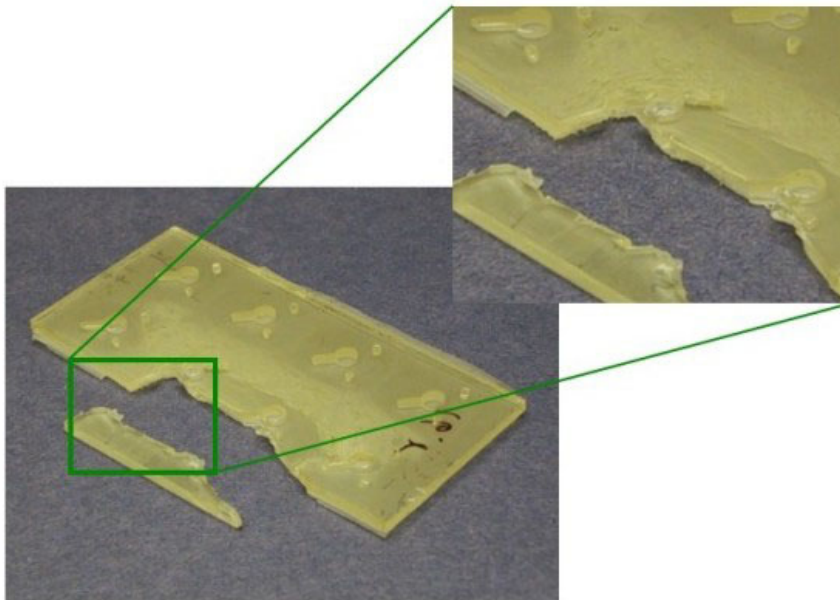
Damaged hot-embossed ball chamber layer due to large demolding / tearing forces.
